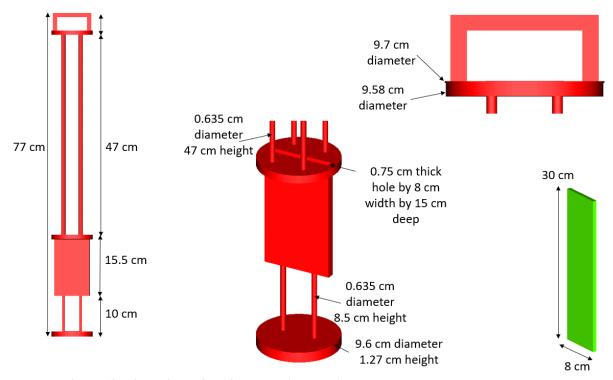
Dimensions of the 0.75 cm thick aluminum plate holder and a Boralcan plate.
